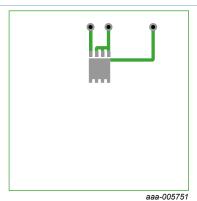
PCB layout for thermal resistance junction to ambient minimum footprint; FR4 Board; 2oz copper
